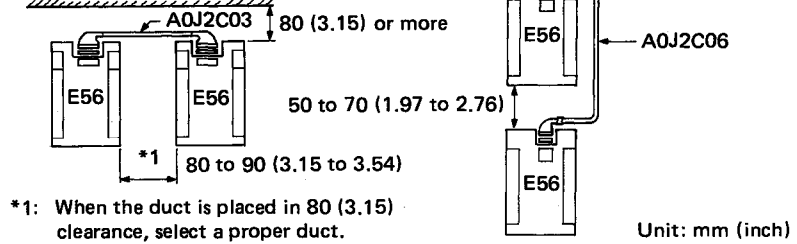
Side-to-Side Installation Fig.5.3 Top-to-Bottom Installation
